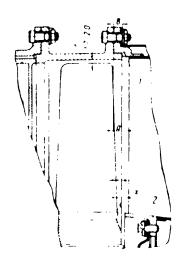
Checking the Clearance letucen the Turbine Disc and the Inner Cone of the Exhaust Duct
